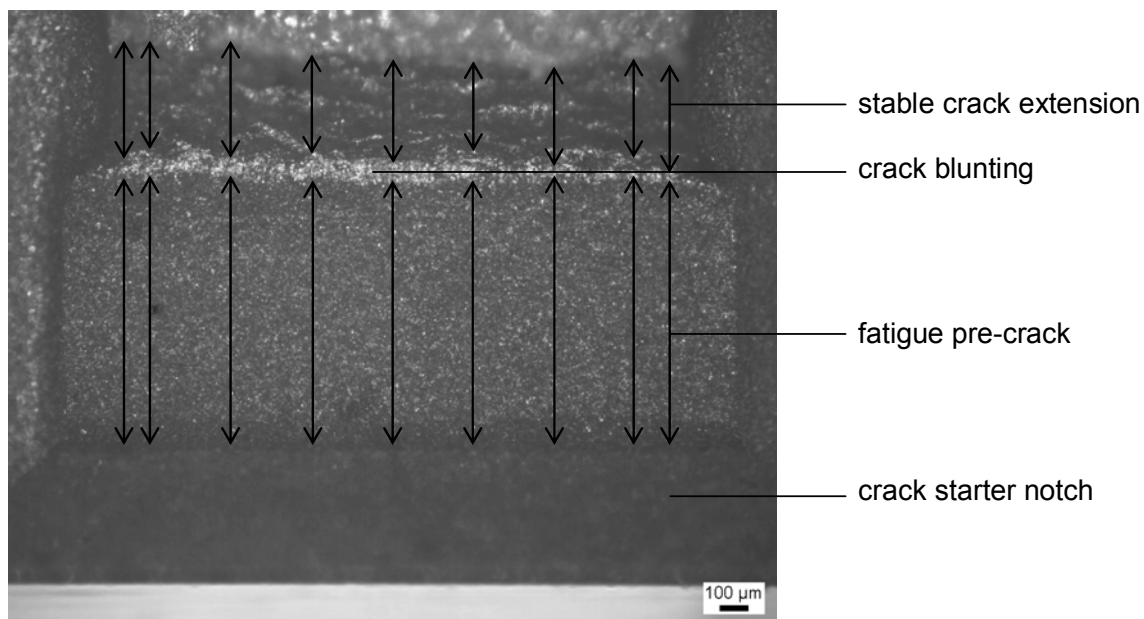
Fracture surface of side grooved mini-bar EUROFER 97 specimen (EF69). Starter notch type "V"; $a_0/W \approx 0.35$; Vertical arrows (separated by crack blunting area in vertical direction) indicate the paths used for assessments of fatigue pre-crack lengths and stable crack extensions.
